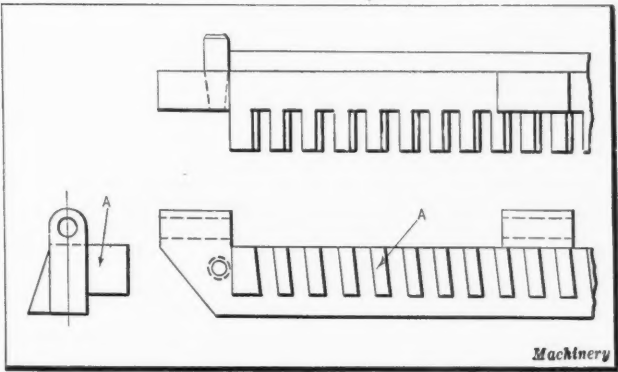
Auxiliary Jaw of Fixture shown in Fig. 10
